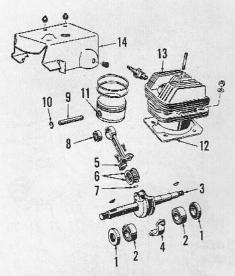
Exploded view showing crankshaft, cylinder and associated parts.
